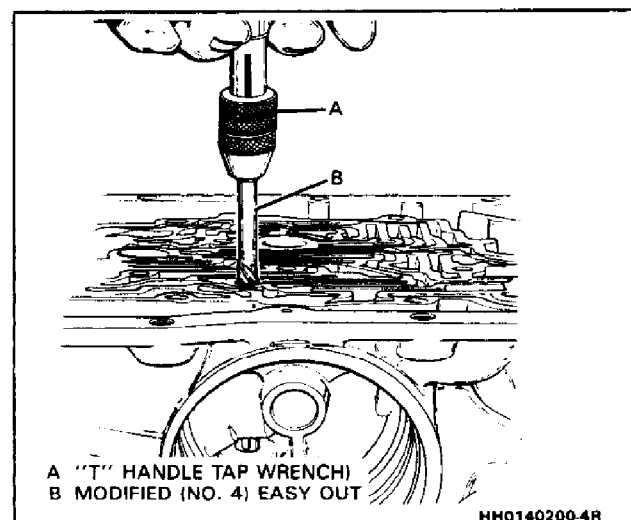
Removing Third Accumulator Retainer and Ball Assembly
